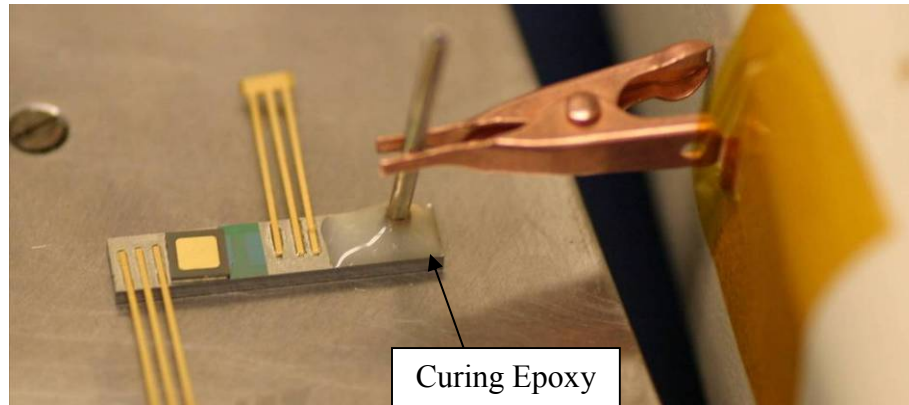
Photo showing how the stainless steel tube is held in place while the epoxy cures
